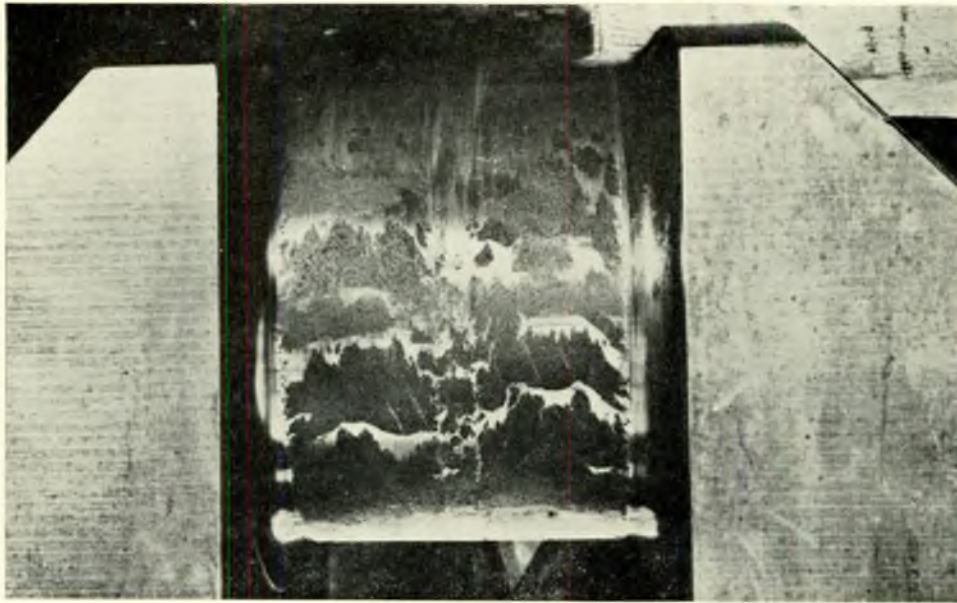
(b)—*Damage to journal and crank pin due to contaminated lubricating oil
